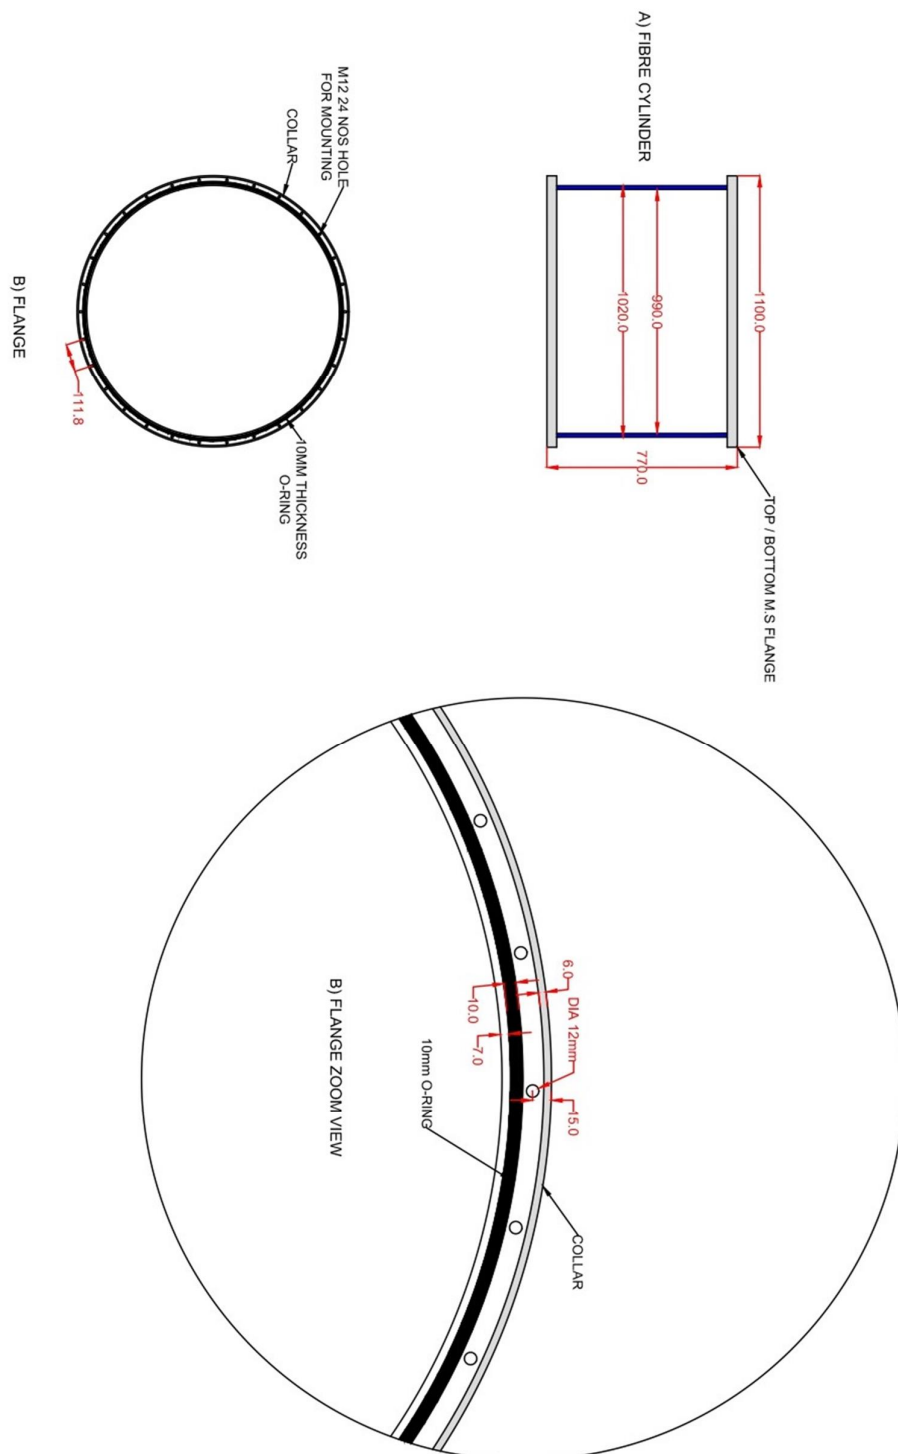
Drawings for Aluminum Top & Bottom Cover, flange and FRP tube
